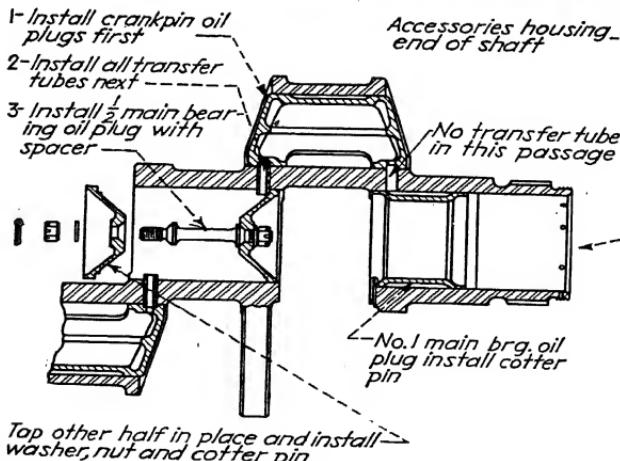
Oil plugs and tubes that connect the oil cavities.
